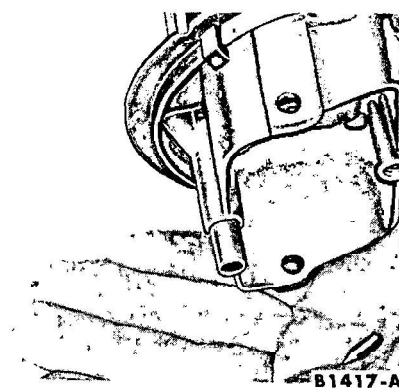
Accelerating Pump Discharge Needle Removal—Holley 4-V
